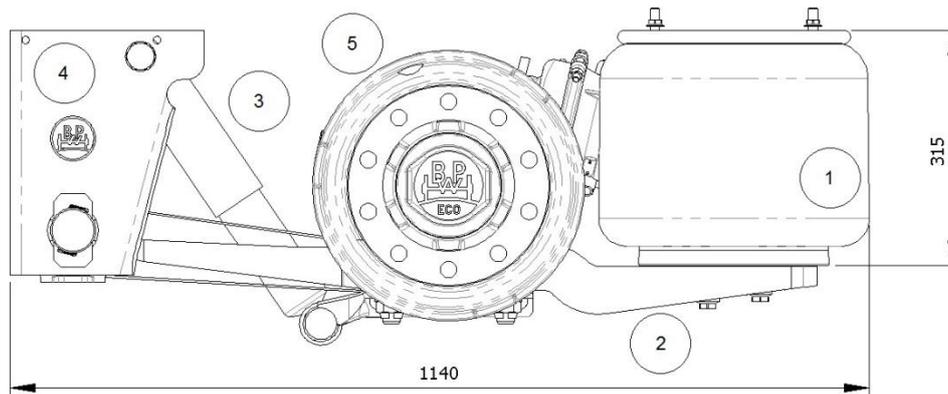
Dependent suspension equipped with air spring truck trailer axle – applied by the REDOS company: 1 – air spring assembly, 2 – suspension arm, 3 – shock absorber, 4 – frame support, 5 – brake drum assembly
